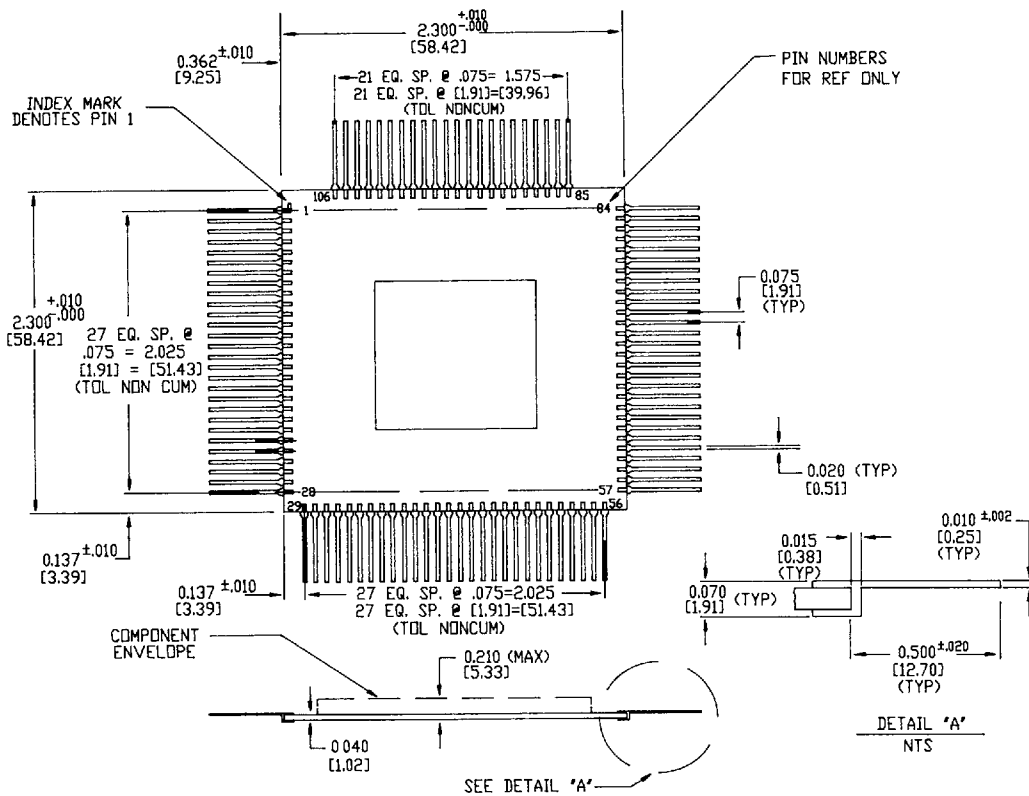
DD-03232 UNFORMED LEADS PACKAGE MECHANICAL OUTLINE
